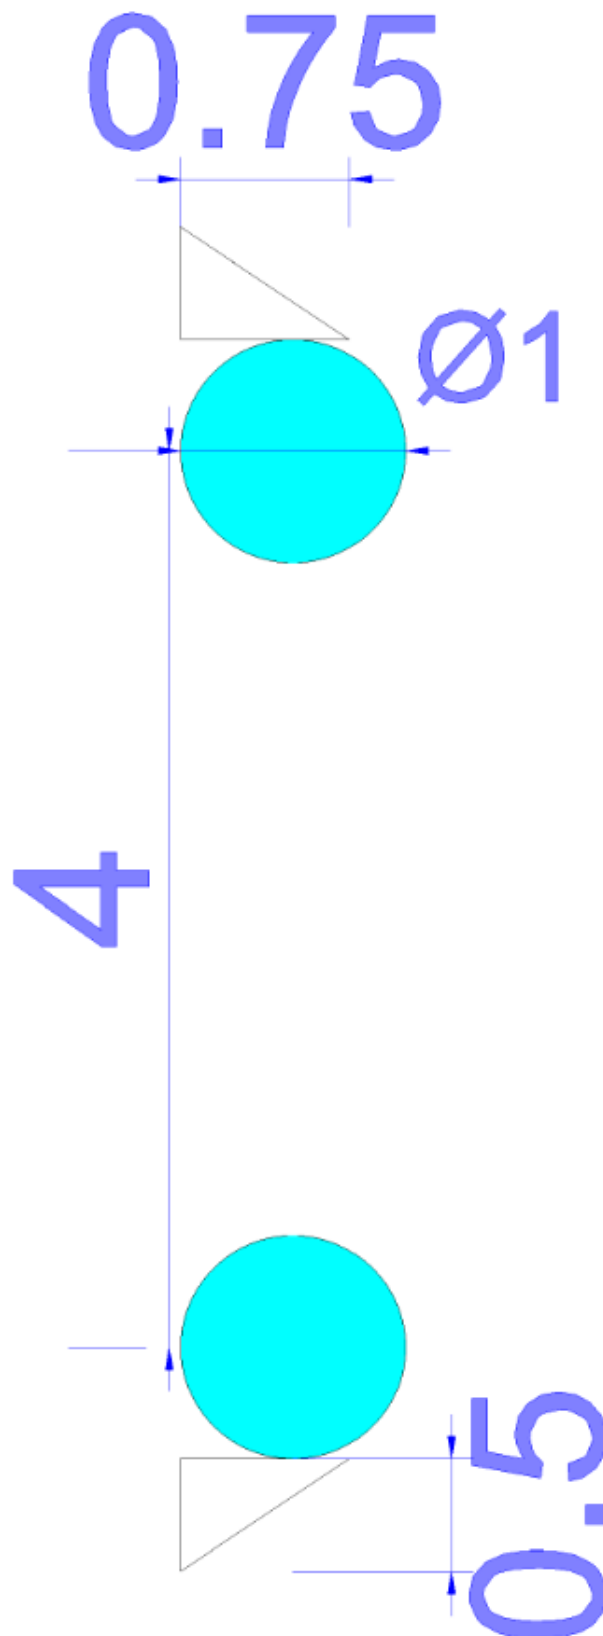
O-ring attachment. O-ring in cyan. The desired contact area is 4 mm. The O-ring has a 3 mm inside diameter and a 1 mm cross section. The attachment has a height of 75% of the O-ring's cross section, to prevent the O-ring from moving.
